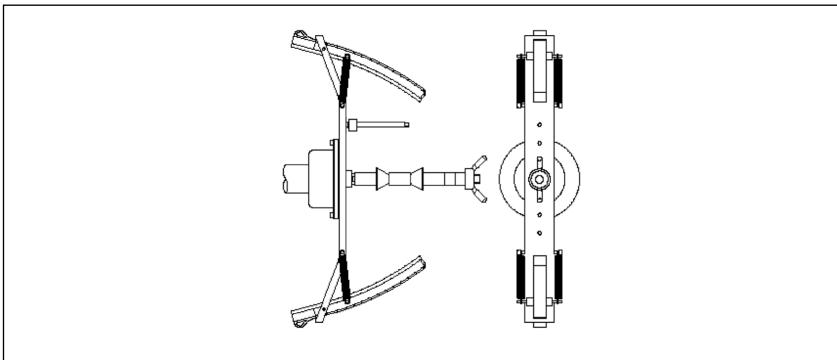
Arranging calibration balance weight on the inner side of the fixture (in Cal3 stage) .
